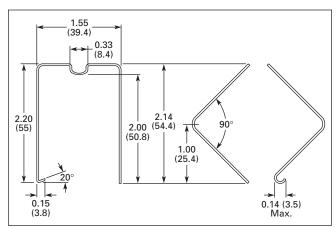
PQC-1332 — Approximate Dimensions in Inches (mm)
